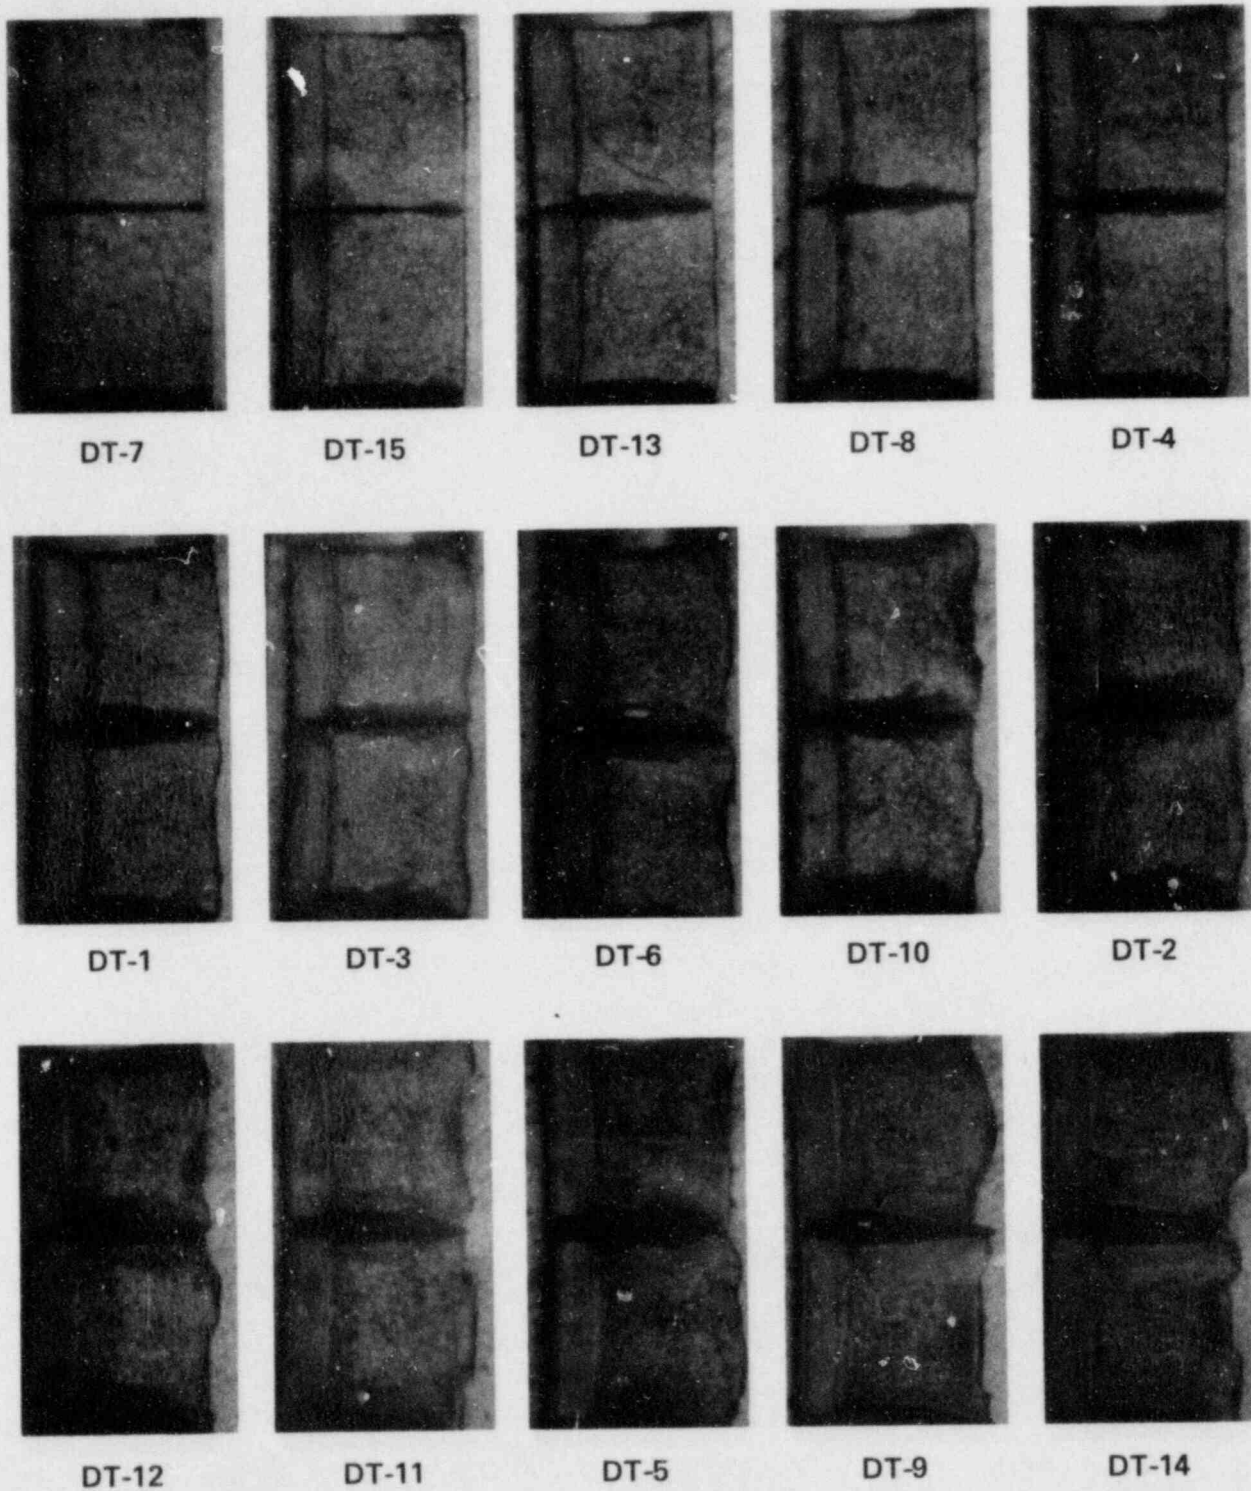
Charpy Impact Specimen Fracture Surfaces for McGuire Unit 1 Reactor Vessel Shell Plate B5012-1 (Transverse Orientation)
